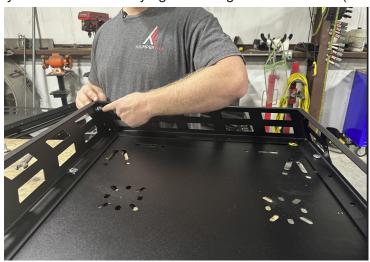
Mount Basket Side Rails (DR & PA) to Basket Front and Rear Rails
